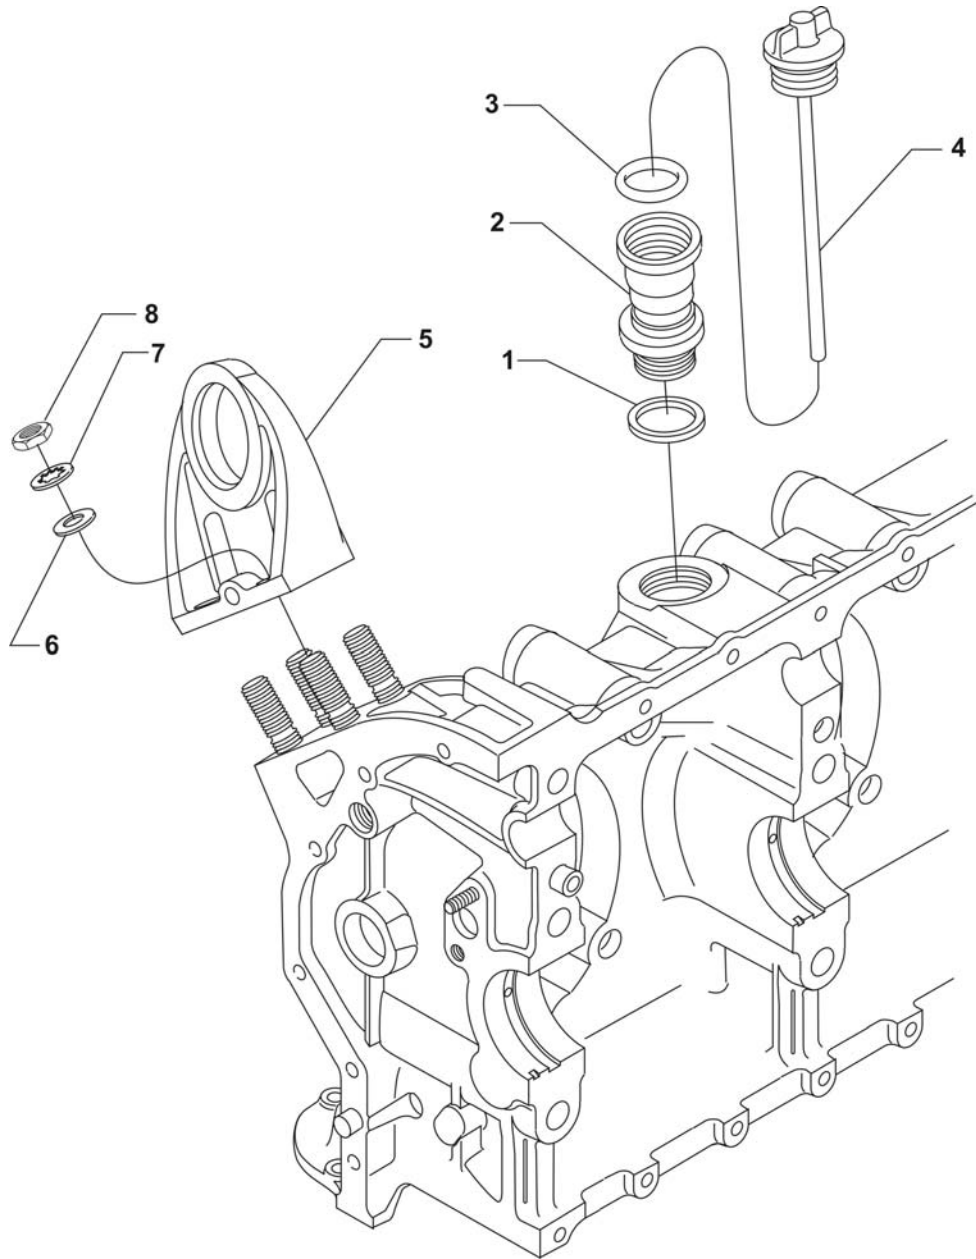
OIL LEVEL GAGE AND ENGINE MOUNTING BRACKETS
